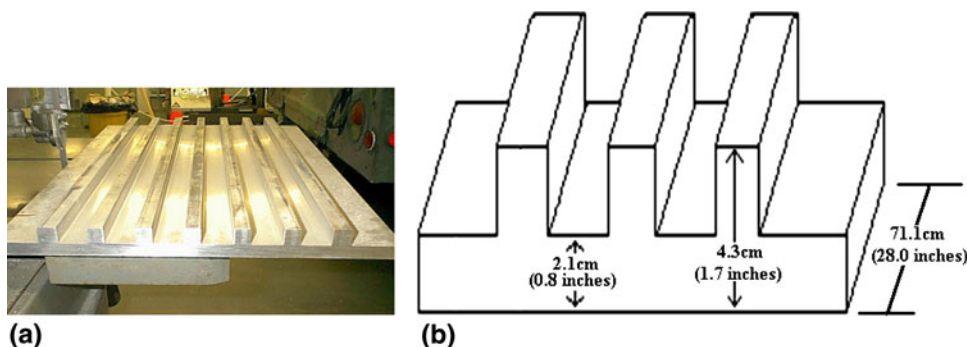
(a) Extruded plates of 7249 alloy with fins, and (b) Initial dimensions of extruded plates
